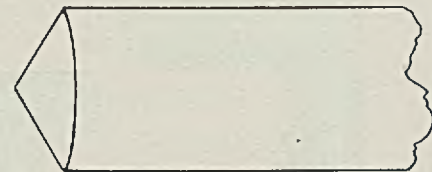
Rod is pointed as shown to improve quality of weld
